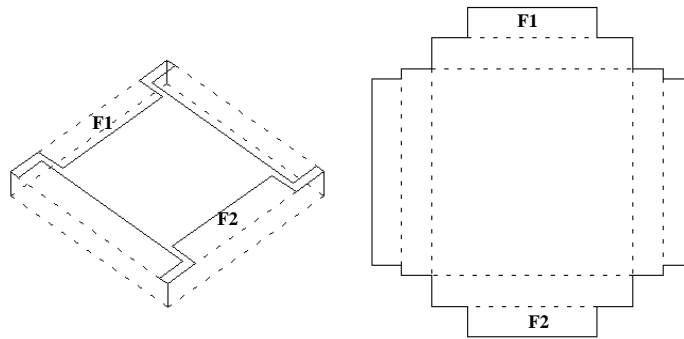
Part shape and flat pattern of an 8-bend box which requires hinged tool. (see Fig. 11)
